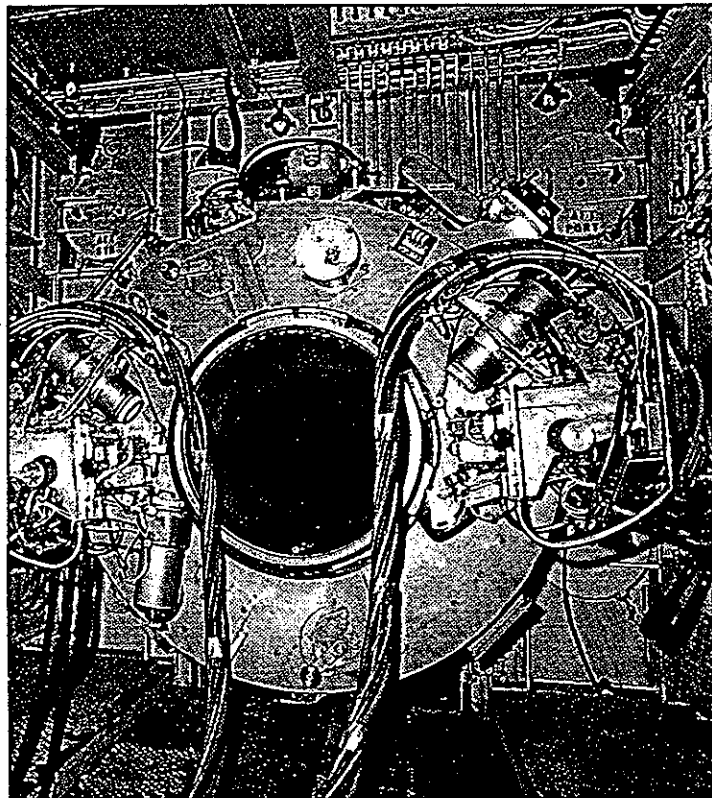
The IMT - a fixture for constraining and preparing the pipe ends and for welding - installed in the habitat
